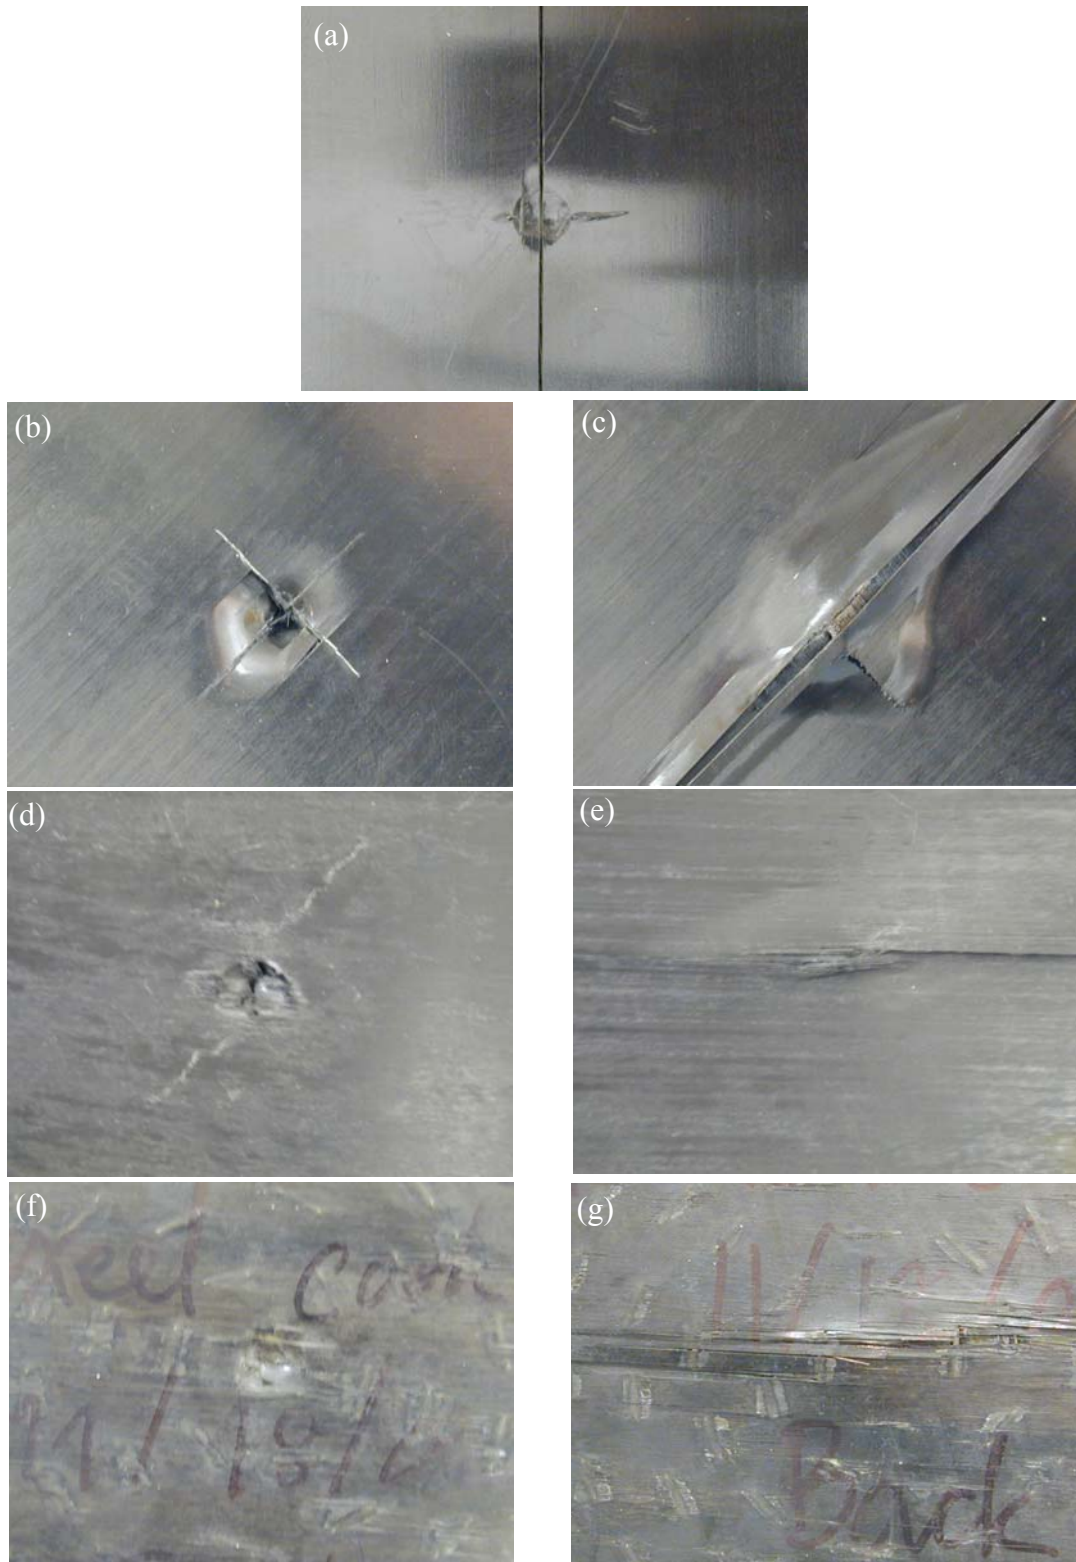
Damage patterns observed in the circular plate test. (a) 0° specimen. (b) and (c) Top and bottom sides of the $\pm 45^\circ$, (d) and (e) top and bottom sides of the helicoidal specimen, (f) and (g) reinforced helicoidal specimen
